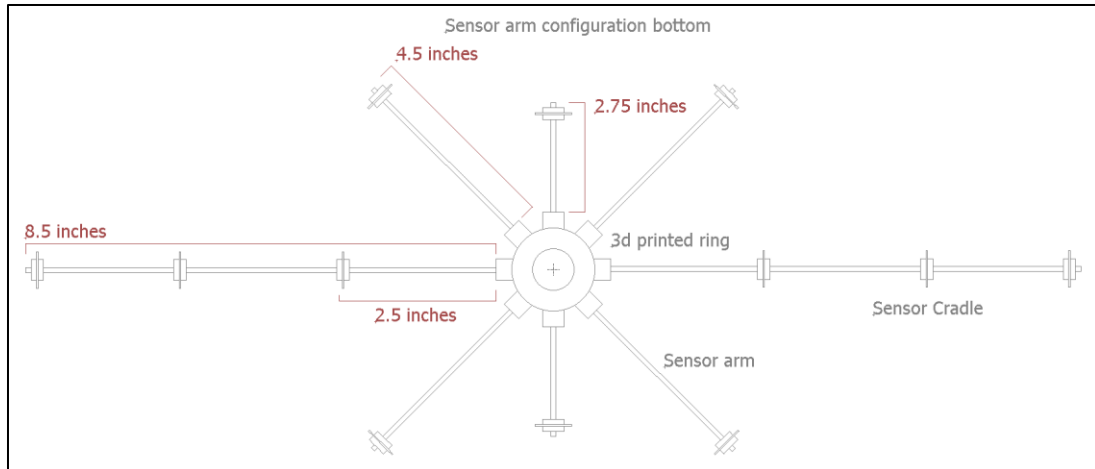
Bottom sensor arm configuration with sensor arm measurements
